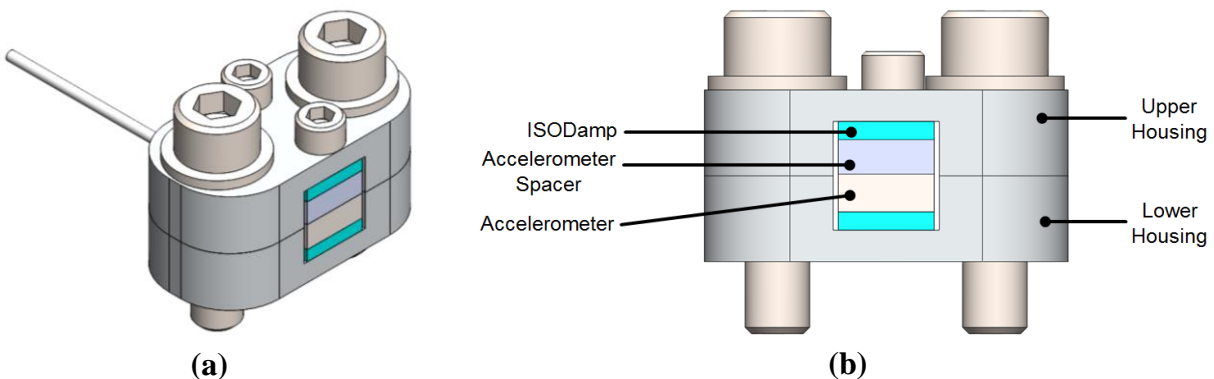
Isometric (a) and Labelled (b) Views of Tiny BOB
